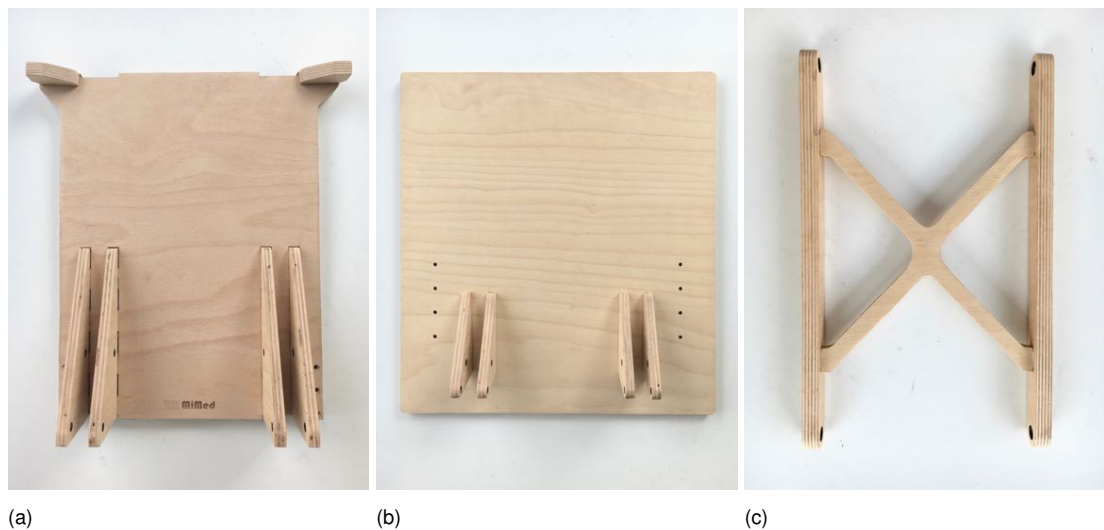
Construction of subassembly parts consisting of base plate (a), seat plate (b) and the linkages (c)
